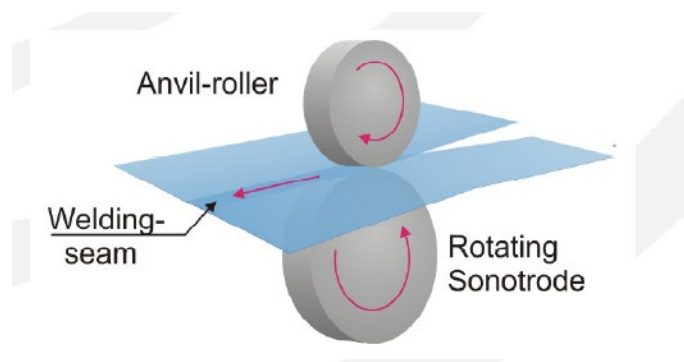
Continuous Ultrasonic Welding with Rotating Sonotrode
